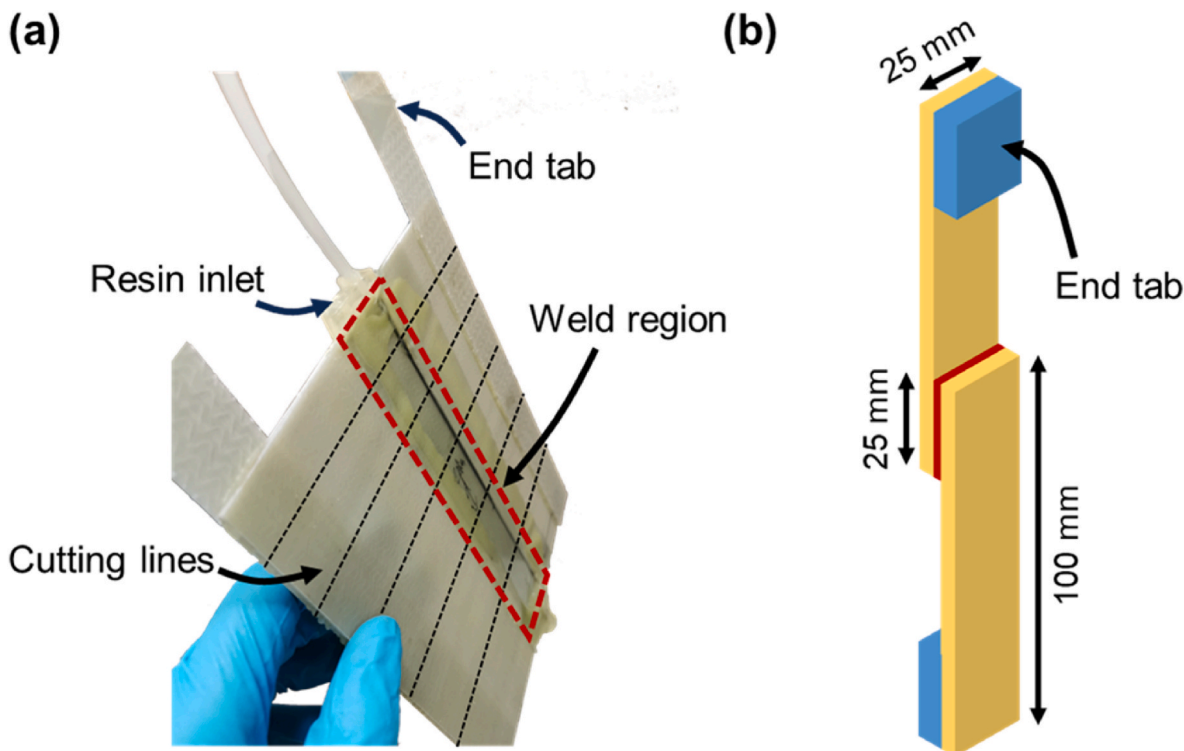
(a) A prepared weld with lines depicting where coupons are cut in black, and the weld region highlighted in red. (b) The single lap coupon geometry with tabs applied. (For interpretation of the references to colour in this figure legend, the reader is referred to the Web version of this article.)
